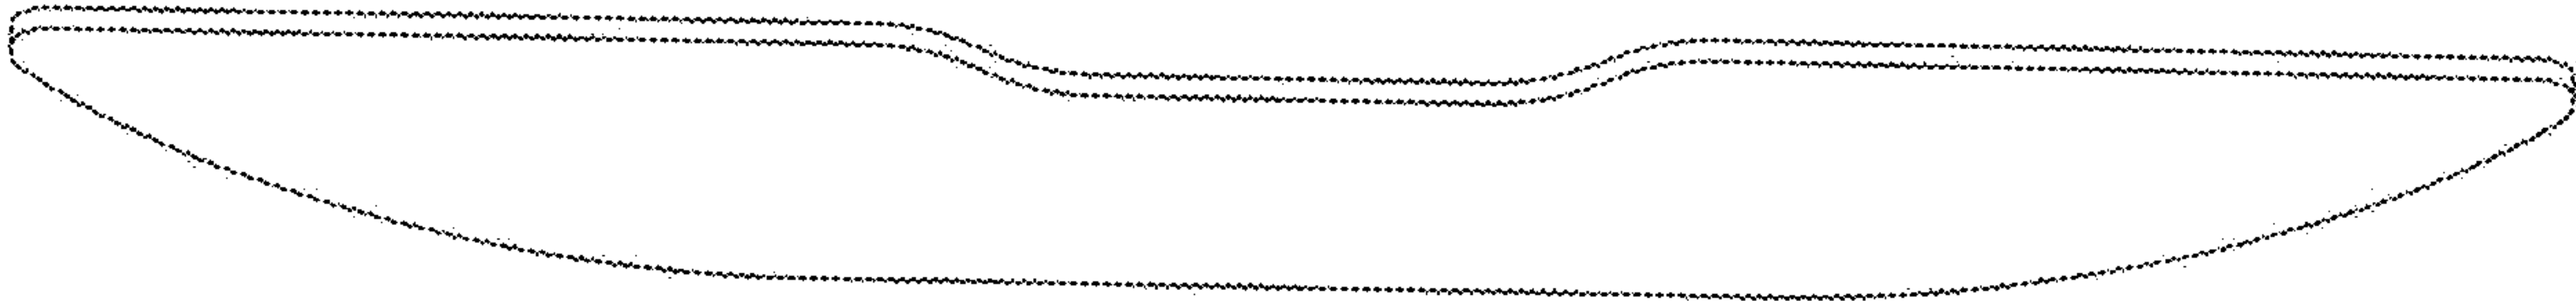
is a top plan view of the concrete connector of FIG. 1;
